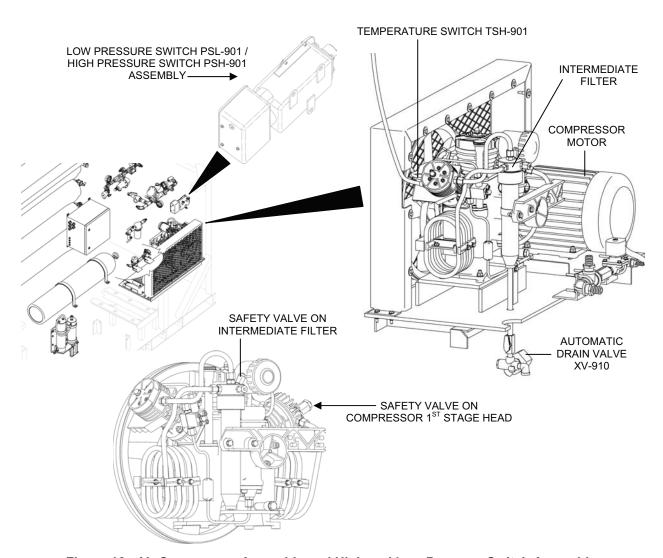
Air Compressor Assembly and High and Low Pressure Switch Assembly.
